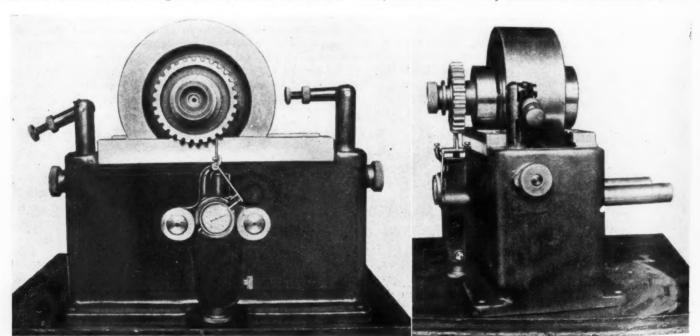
Front view of involute testing instrument with gear in position for inspection
